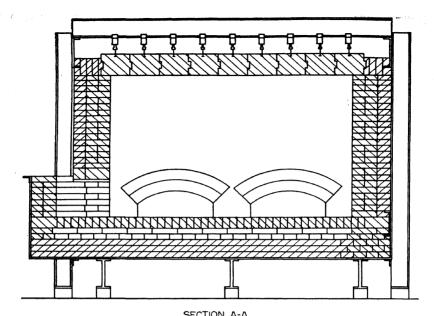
Reverberatory holding furnaces in the die-casting department of a large plant. Furnaces of this type are built in a wide range of sizes.
